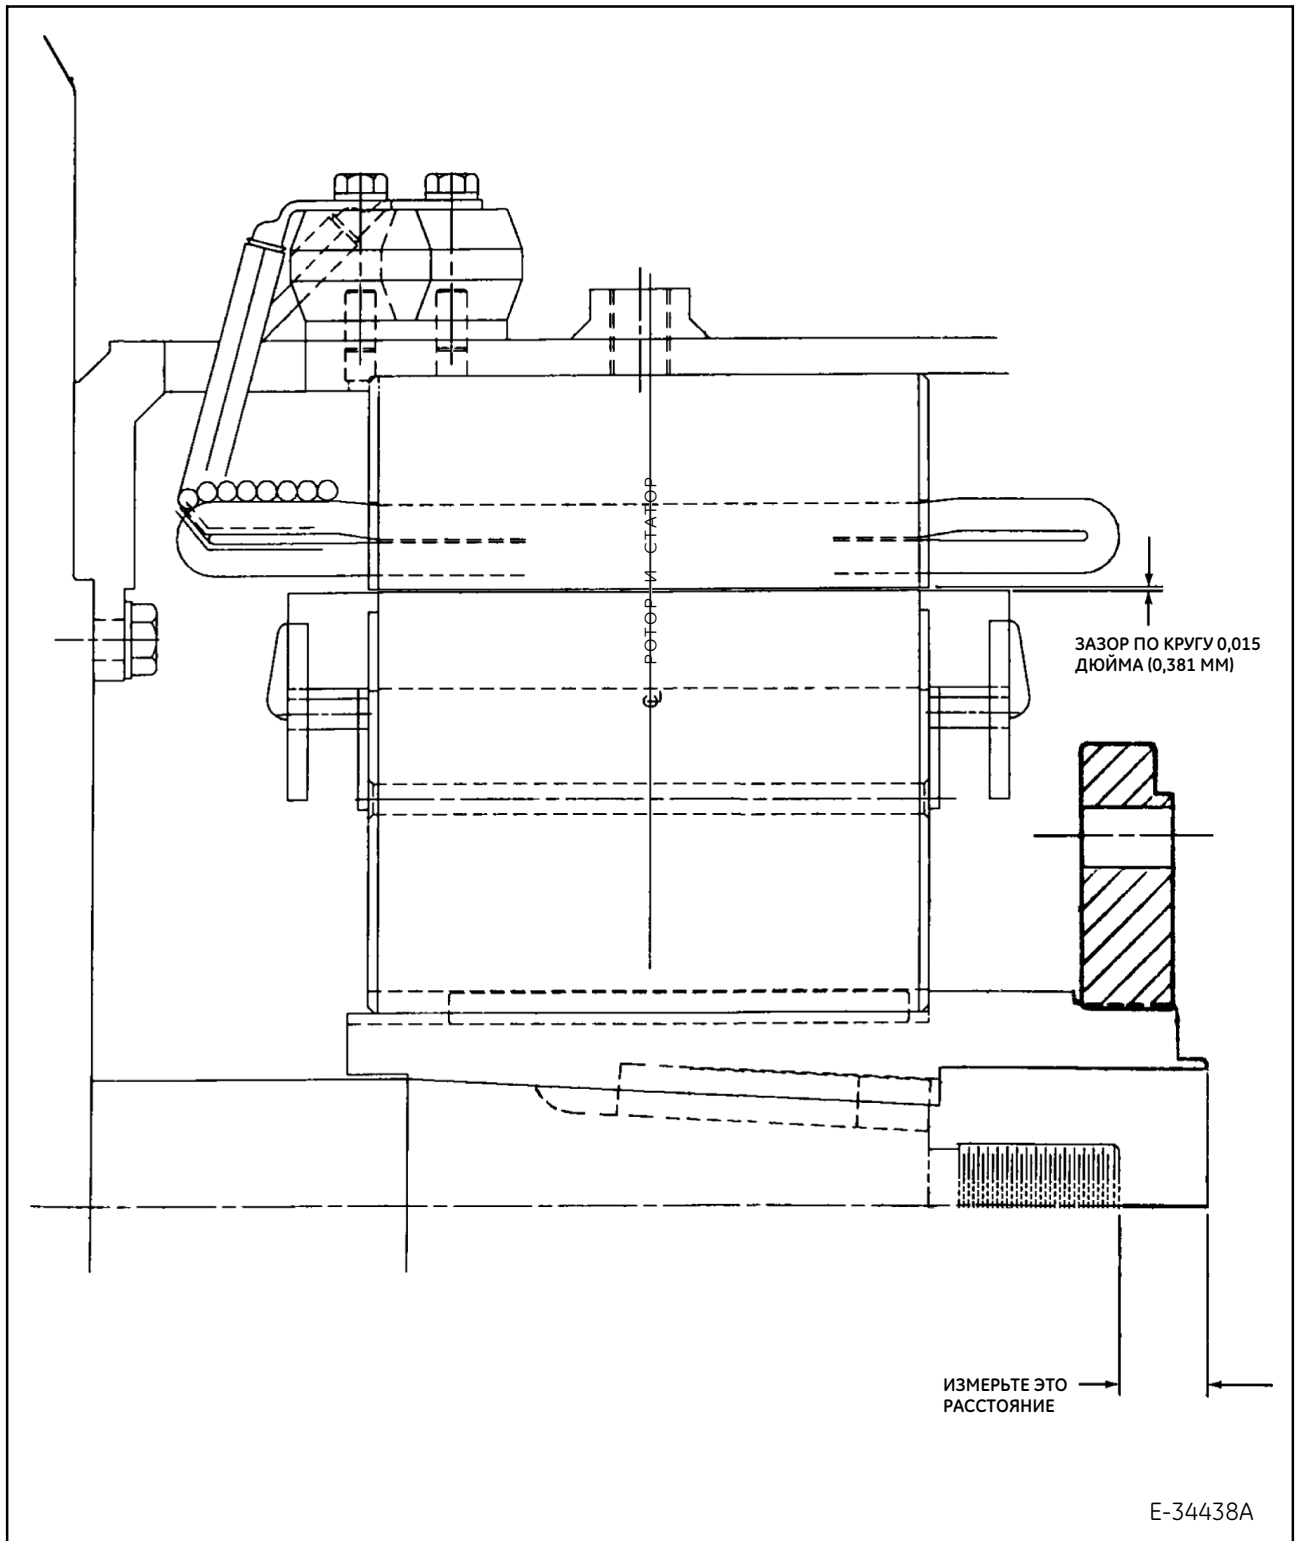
Measure Distance Between End of Rotor and End of Compressor Shaft
